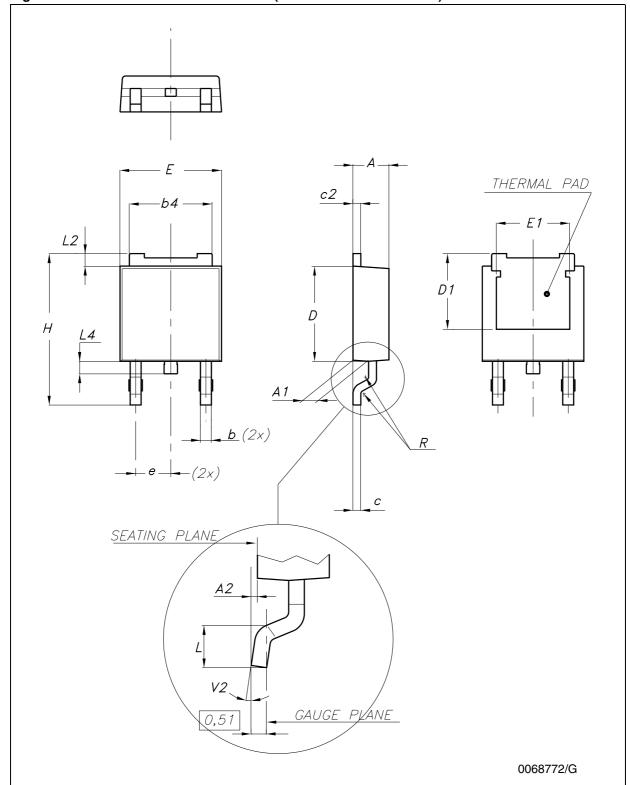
DRAWING DIMENSION DPAK (TYPE FUJITSU-SUBCON.)
